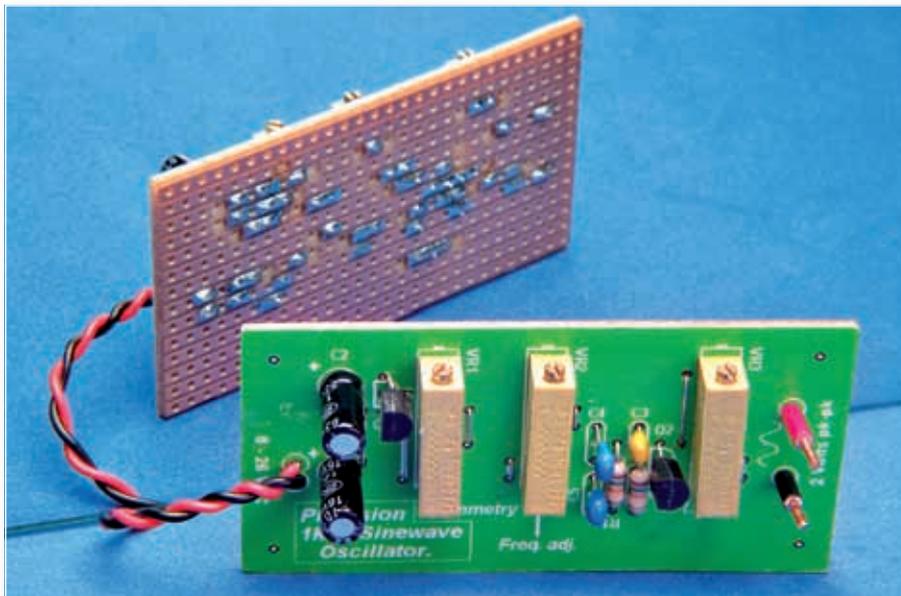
Pete Keirle uses Veroboards to make a form of p.c.b.
